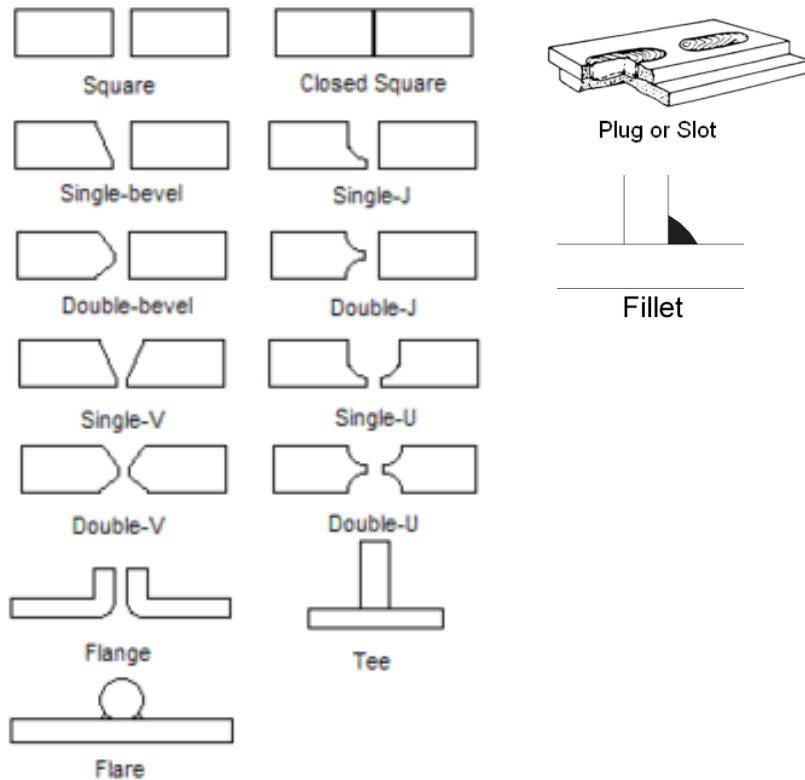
Shows a cross sectional view of how different types of welds are constructed.
